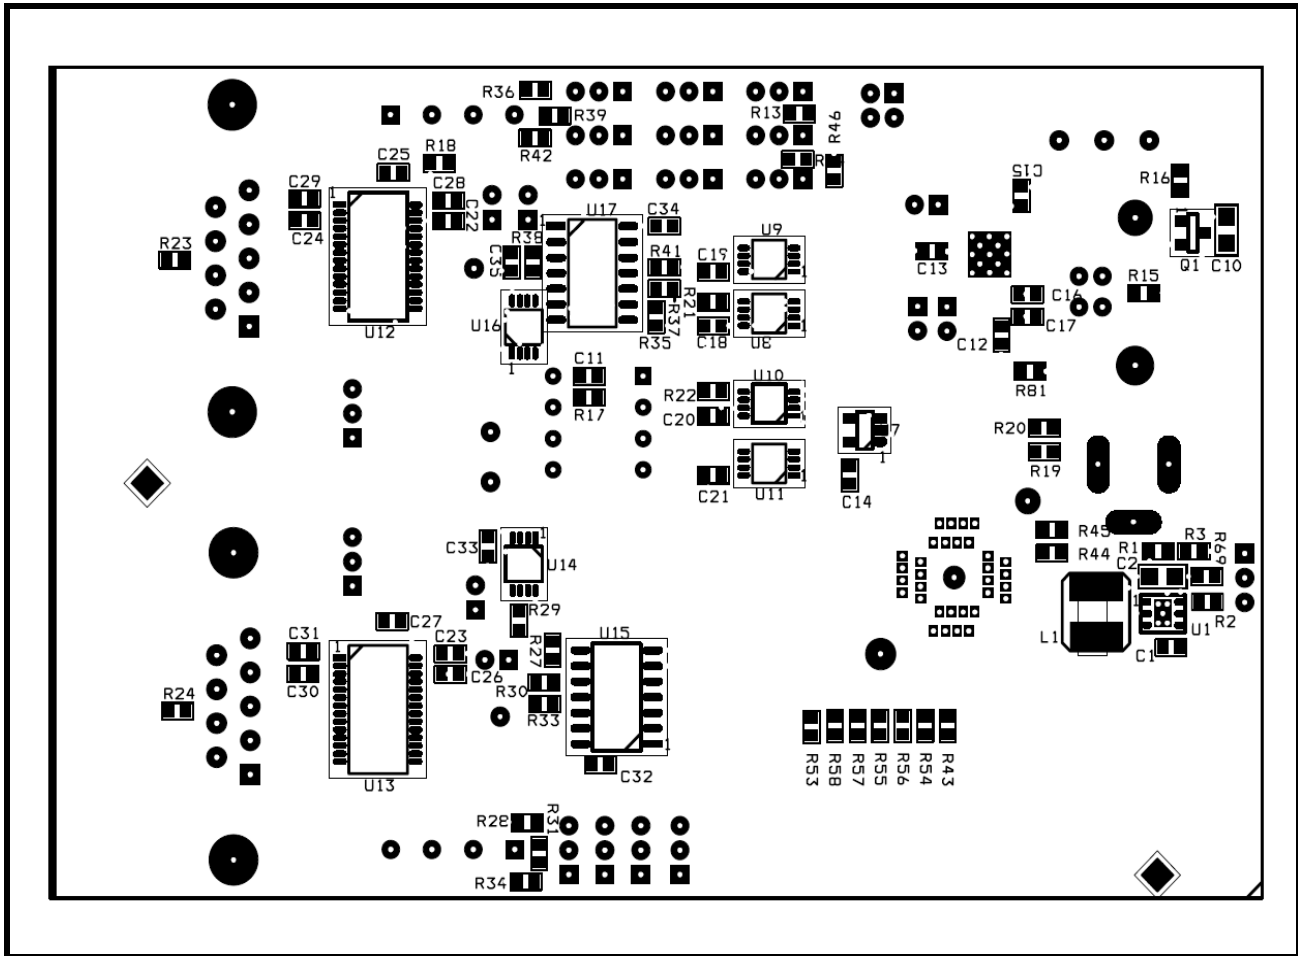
shows a bottom view of XR21V1412 evaluation board layout.
